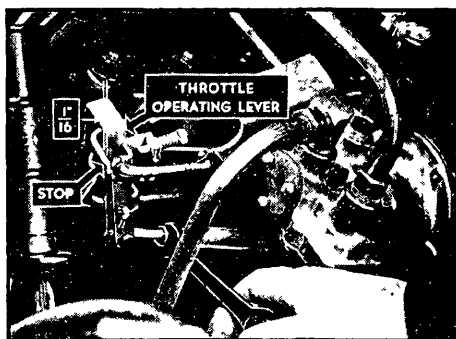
Accelerator-to-clutch control valve rod adjustment. 1946-50 Electromatic Clutch
